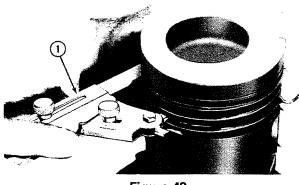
Cleaning Piston Ring Grooves 1. Piston Ring Groove Cleaner
